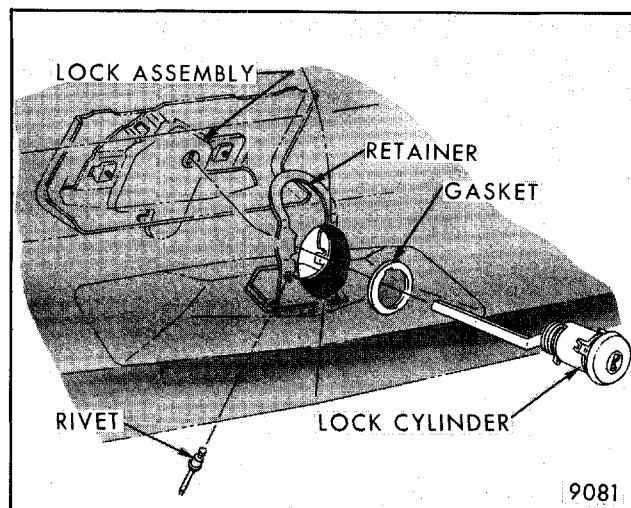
Typical Bottom Loading Lock Cylinder Retainer
